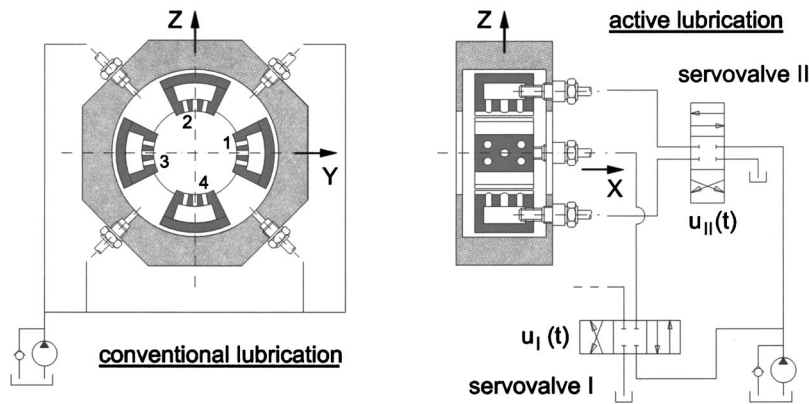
Actively lubricated tilting-pad bearing and oil injection system
